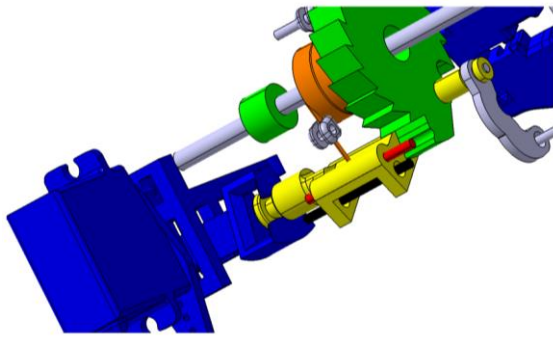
Details on how the locking slider (yellow) with fixed bolt (red) blocks the crankshaft wheel (green) by sliding along two blank rods (black, second one is hidden)
